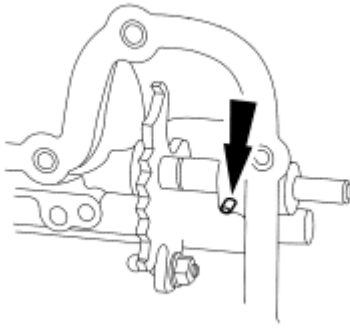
Manual Valve Detent Lever Shaft Retaining Pin
